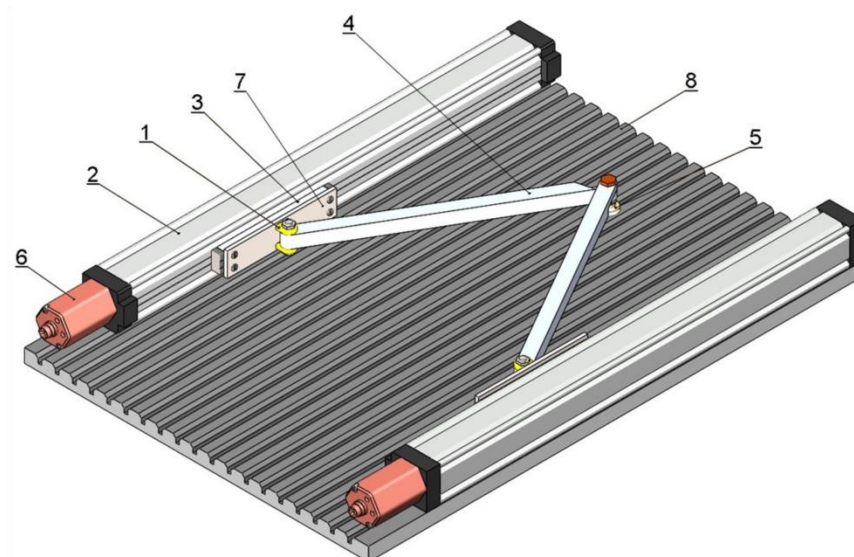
A solid model of a parallel manipulator (1—bearing, 2—actuator, 3—actuators, 4—arm, 5—end-effector, 6—position transducer, 7—mounting plates, 8—base).
